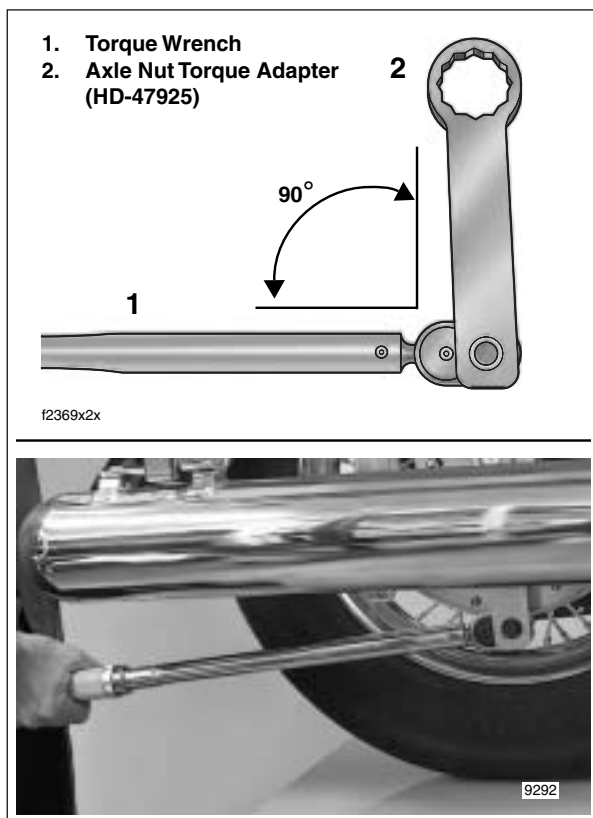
Install Tool Perpendicular to Torque Wrench
